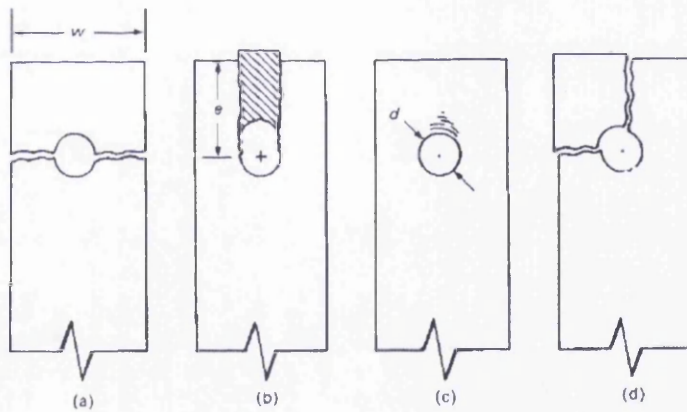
Bolted joint failure modes: a) Tensile; b) Shear; c) Bearing and d) Cleavage [102]
